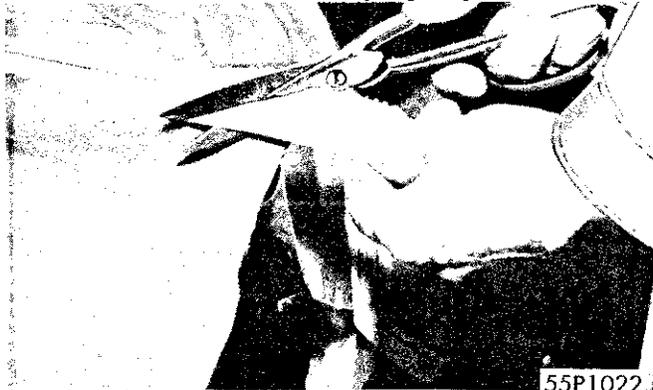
Trimming Excess Listing Even with Edges of Headlining (Chrysler, DeSoto)
